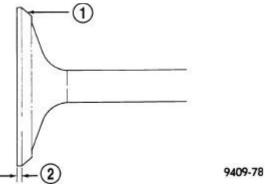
Intake and Exhaust Valve Refacing Courtesy of CHRYSLER LLC
